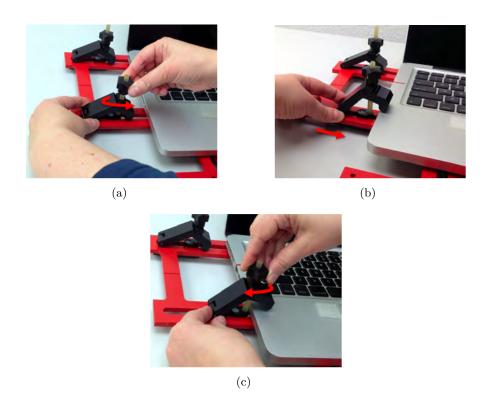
(a) Loosening the clamp screw, (b) adjusting the height and position of the fixing point, and (c) tightening the clamp screw.
